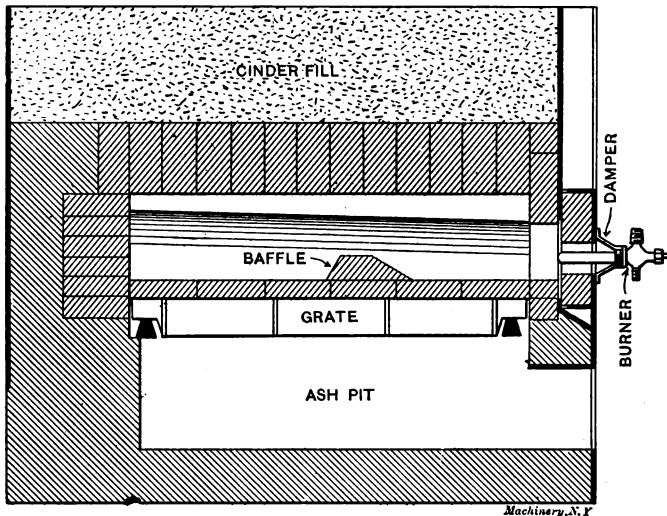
Longitudinal Section, Refitted Casehardening Furnace
